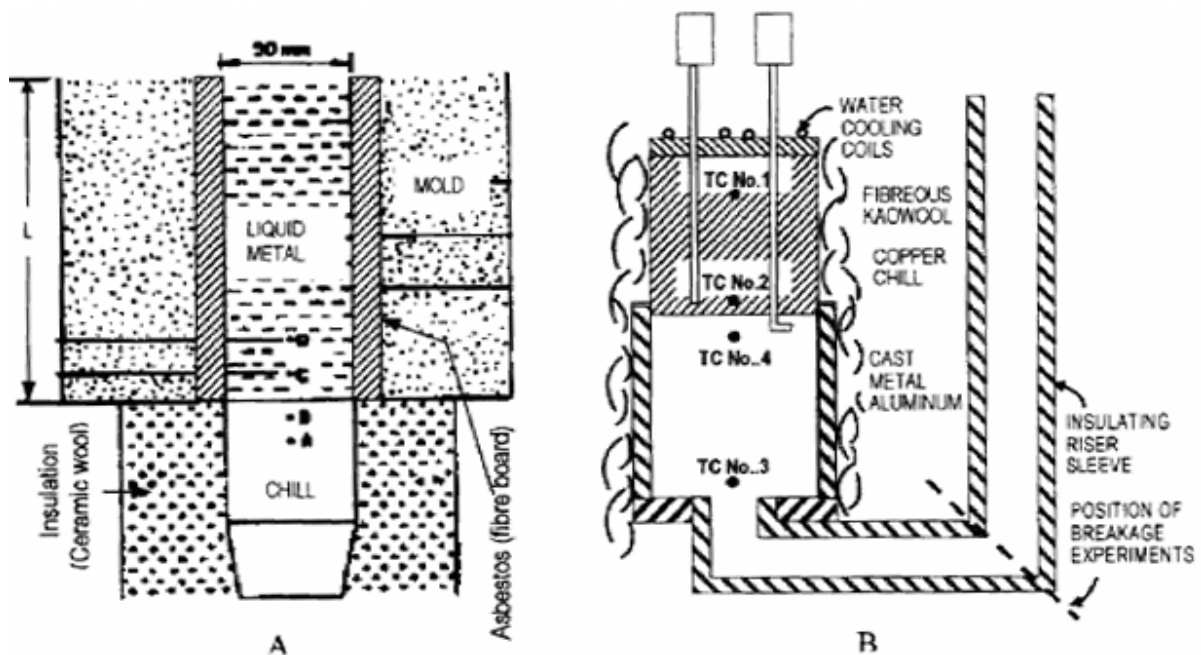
(A) Casting setup for constant metallostatic head experiment [29].
